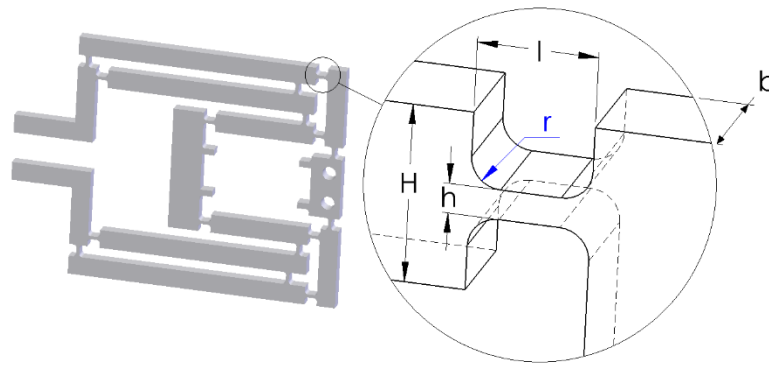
Model and basic hinge dimensions of the flexure hinges.
